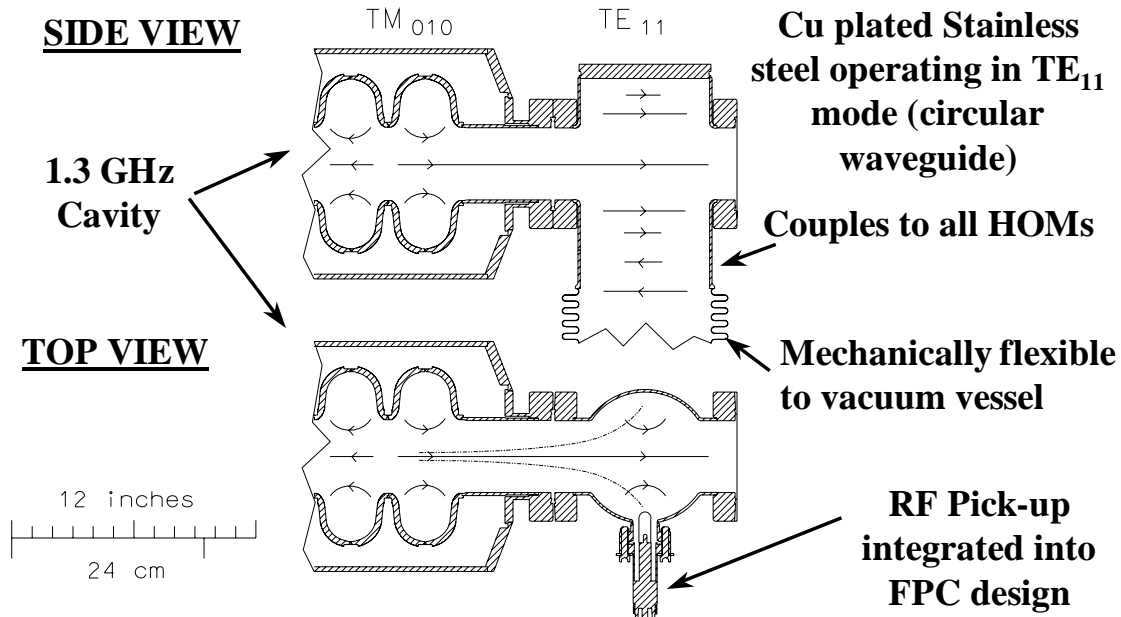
Circular waveguide power coupler and HOM damper, side view (above) and top view (below).
